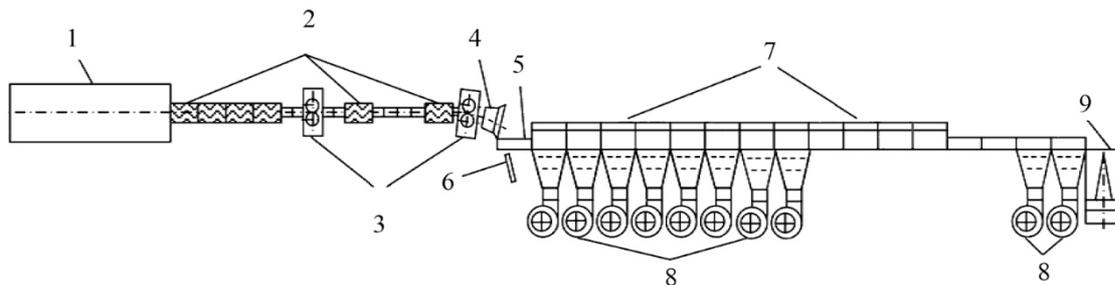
The scheme of the main equipment location at the wire rod water-air cooling stage: 1 – wire-rolling unit; 2 – water cooling section; 3 – pinch roll unit; 4 – laying coiler; 5 – rolled stock coils receiving table; 6 – pyrometer; 7 – regulated air-cooling section with a roller conveyor and heat insulation covers; 8 – air blower systems; 9 – coil receiver pit
